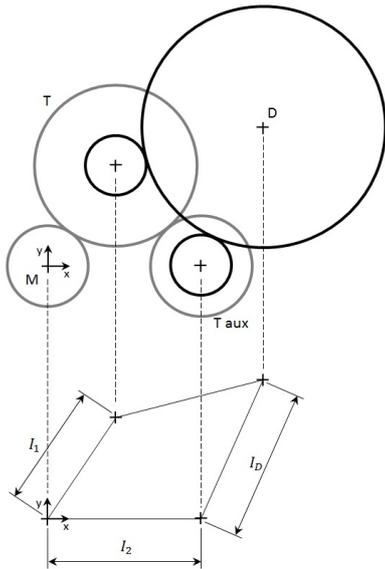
Datum set of the 3SG-6G gearbox.
